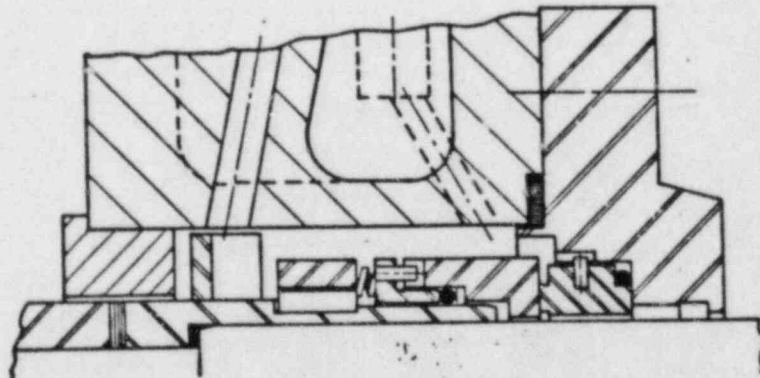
TYPE "HPTO" DURA SEAL W/ CIRCULATING RING.
